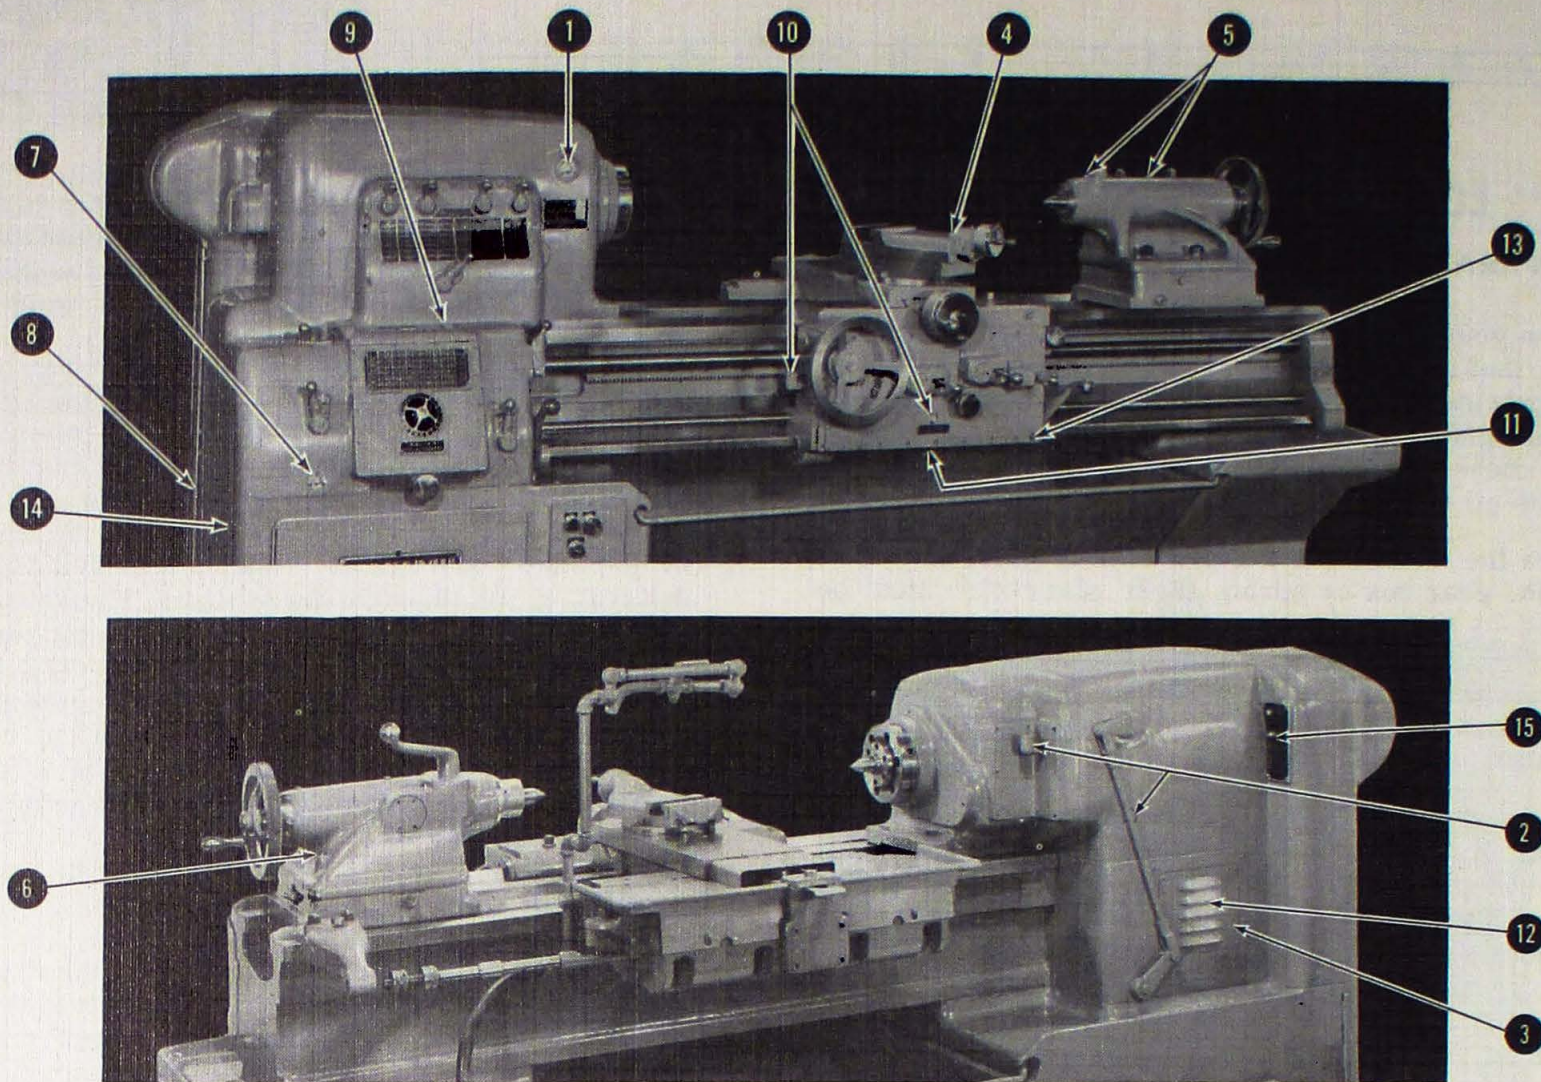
Series 61 Engine and Toolmaster Lathe
